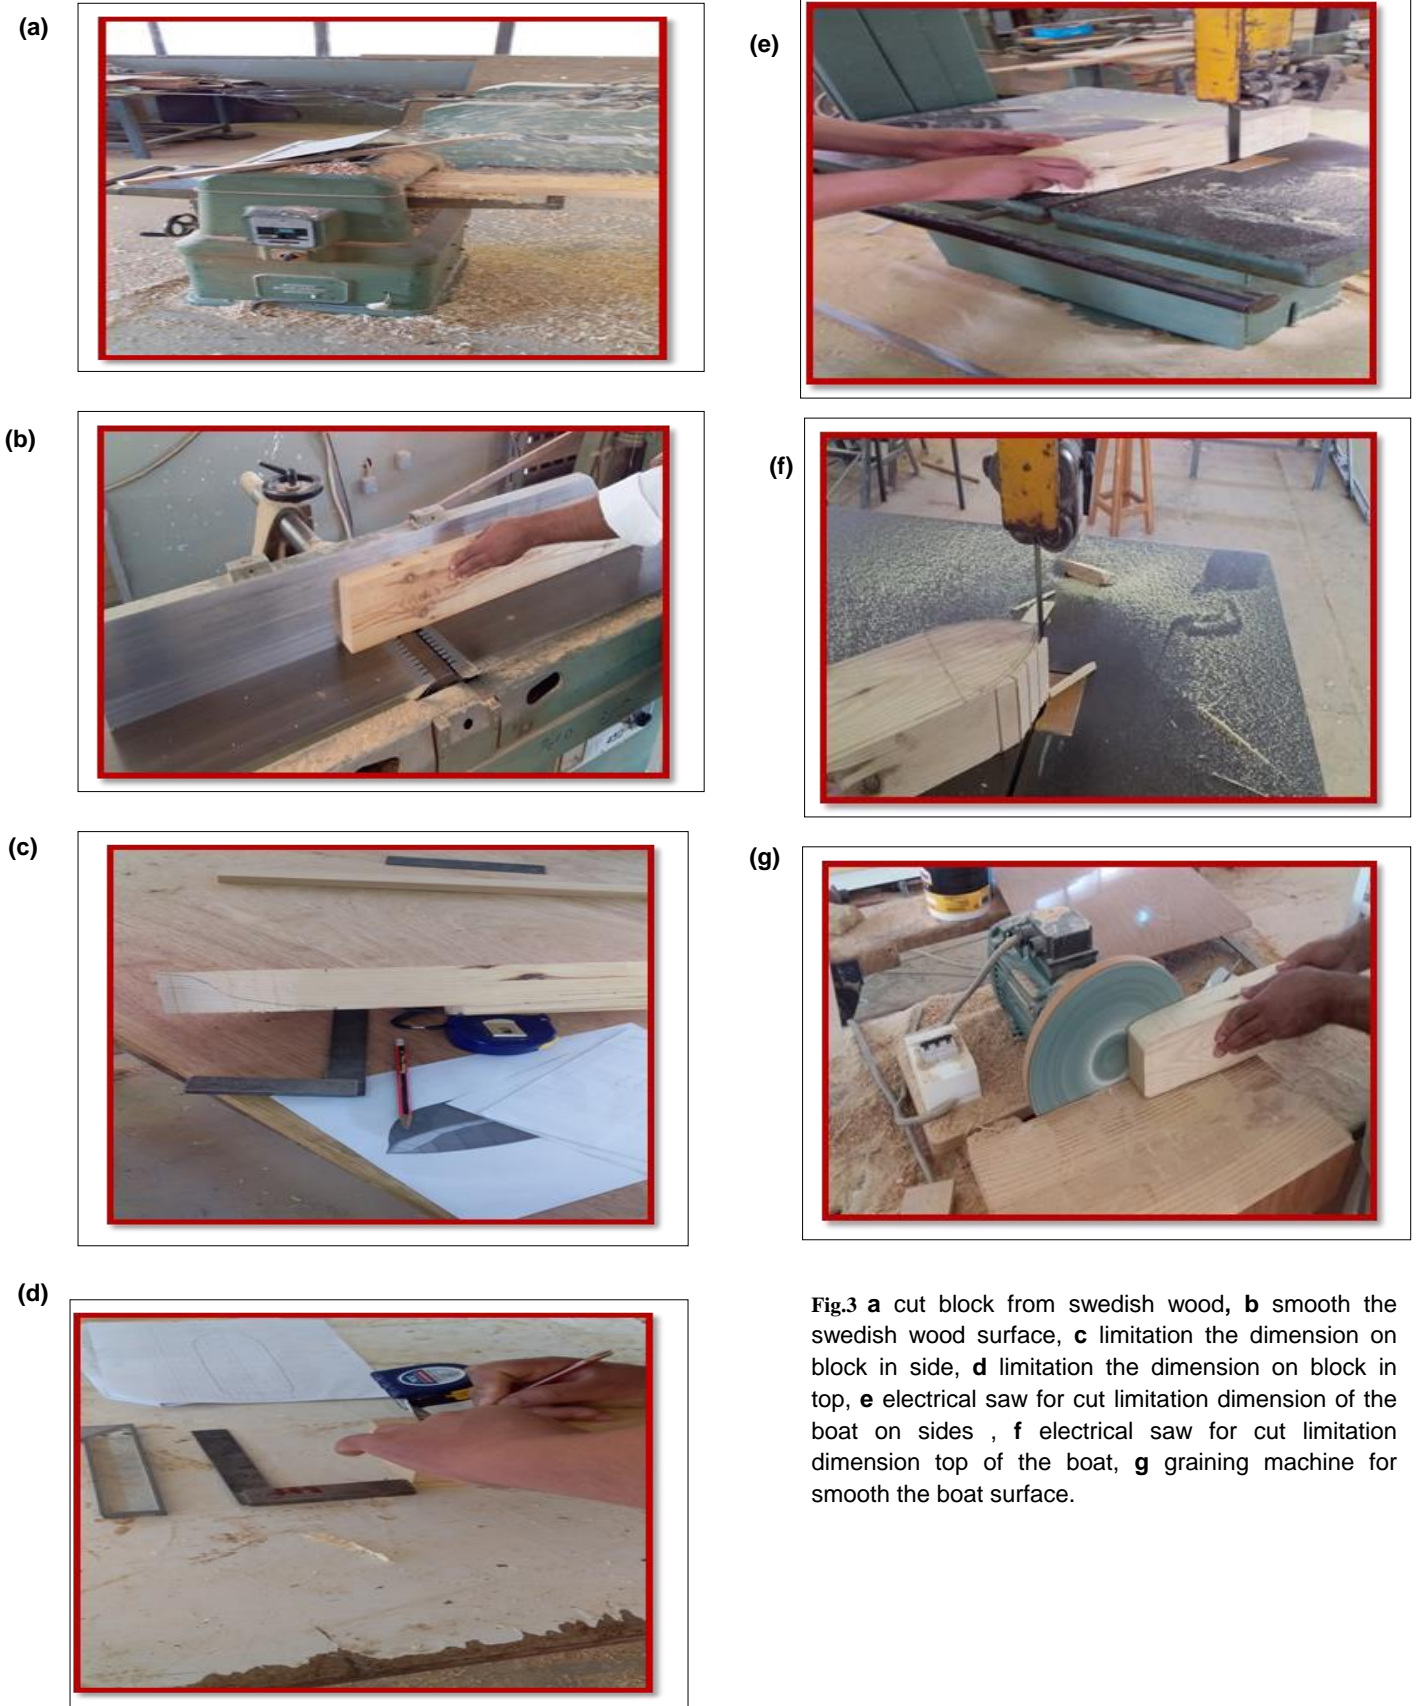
a cut block from swedish wood, b smooth the swedish wood surface, c limitation the dimension on block in side, d limitation the dimension on block in top, e electrical saw for cut limitation dimension of the boat on sides , f electrical saw for cut limitation dimension top of the boat, g graining machine for smooth the boat surface.
